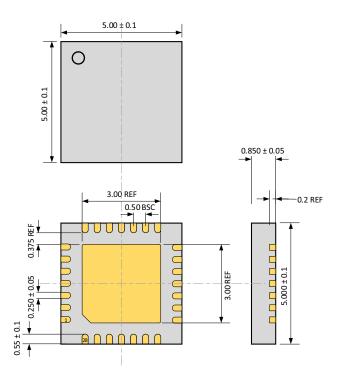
QFN 28-pin 5x5mm drawing (all dimension in mm)
